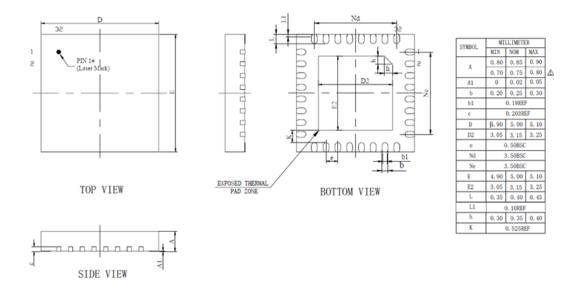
AU5426 32 Pin 5mm x 5mm Package Dimensions
